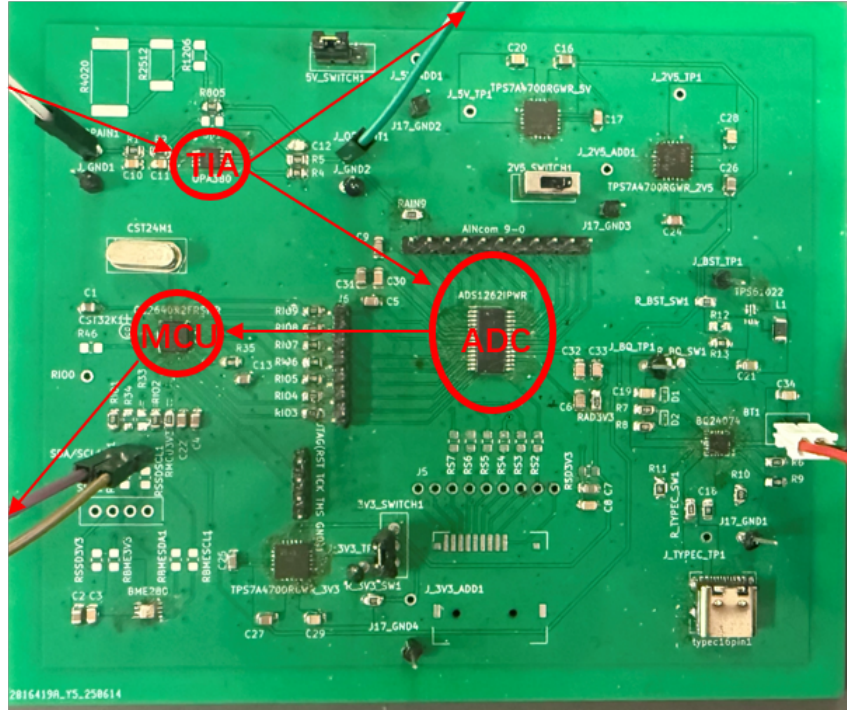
Fabricated PCB of the hydrogen sensor readout system.
